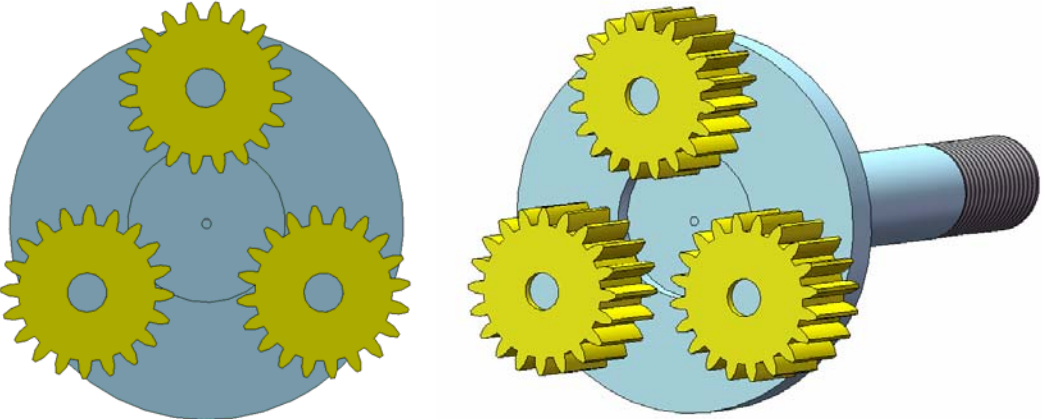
A planetary gear train with the sun gear and ring gear hidden
